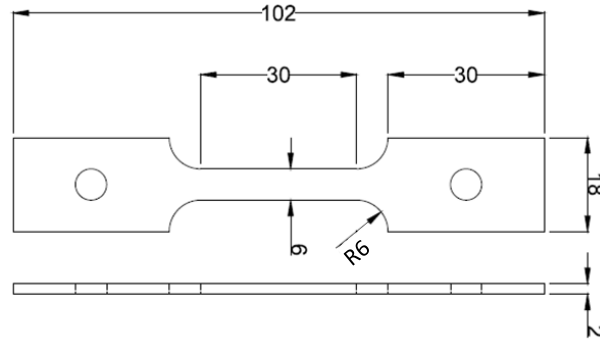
Geometry of flat tensile test specimen. All dimensions are in 'mm'.
